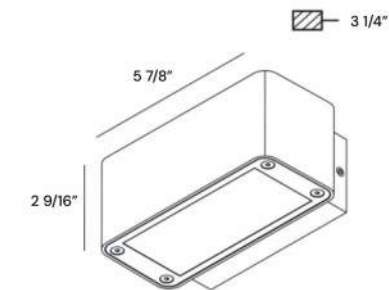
Product Selection - Alcon 14056 Architectural Outdoor LED Wall Light
